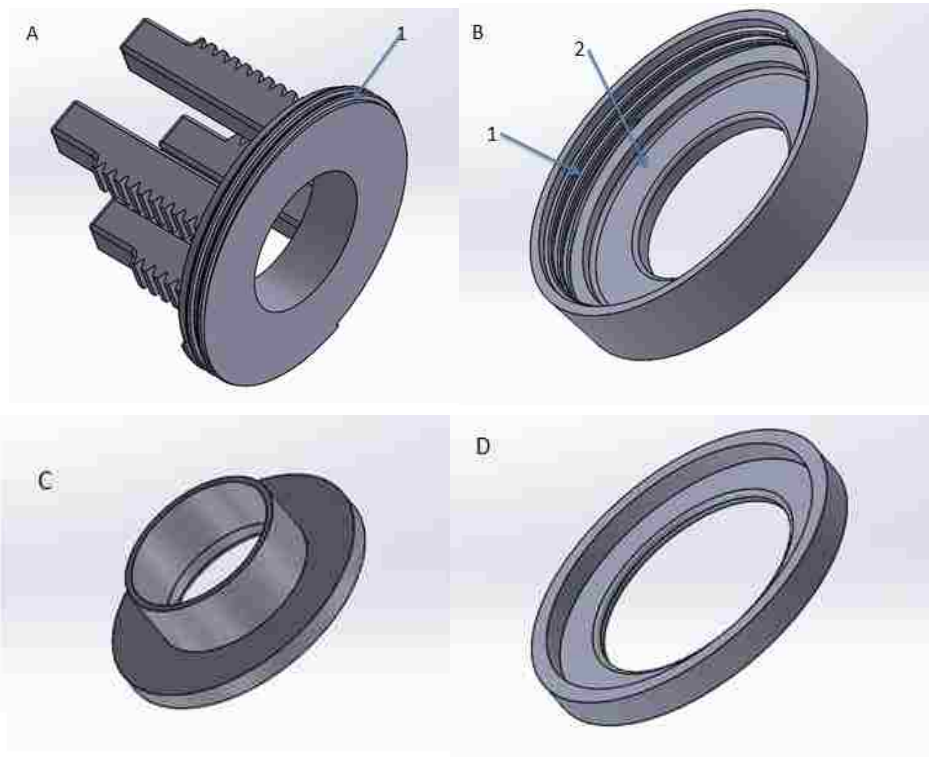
New working part of the final design: A-1.External thread on the gear rack part; B-1.Internal thread on the anchor cup; B-2.Locating the circular groove; C.Culture plate; D.Membrane holding cup
